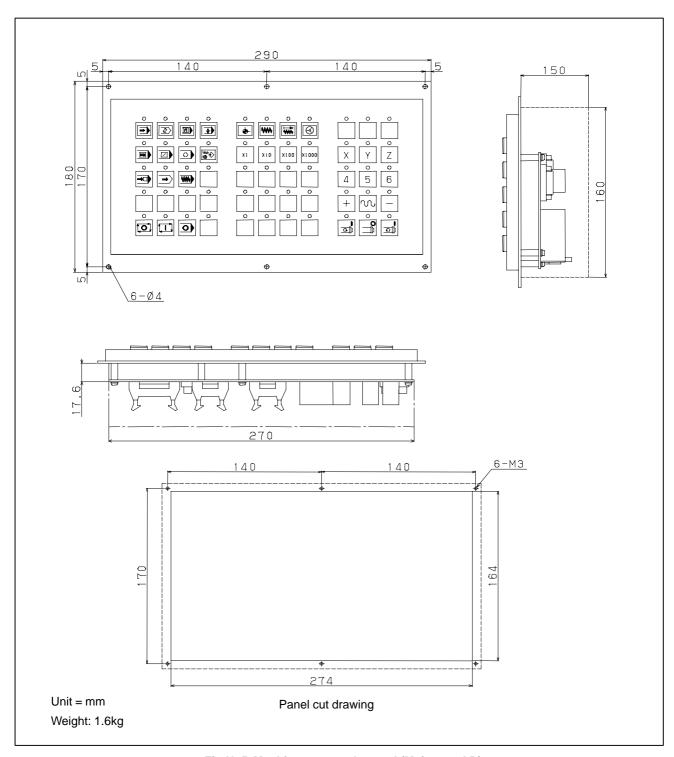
Machine operator's panel (Main panel B) Specification No. : A02B-0236-C231
